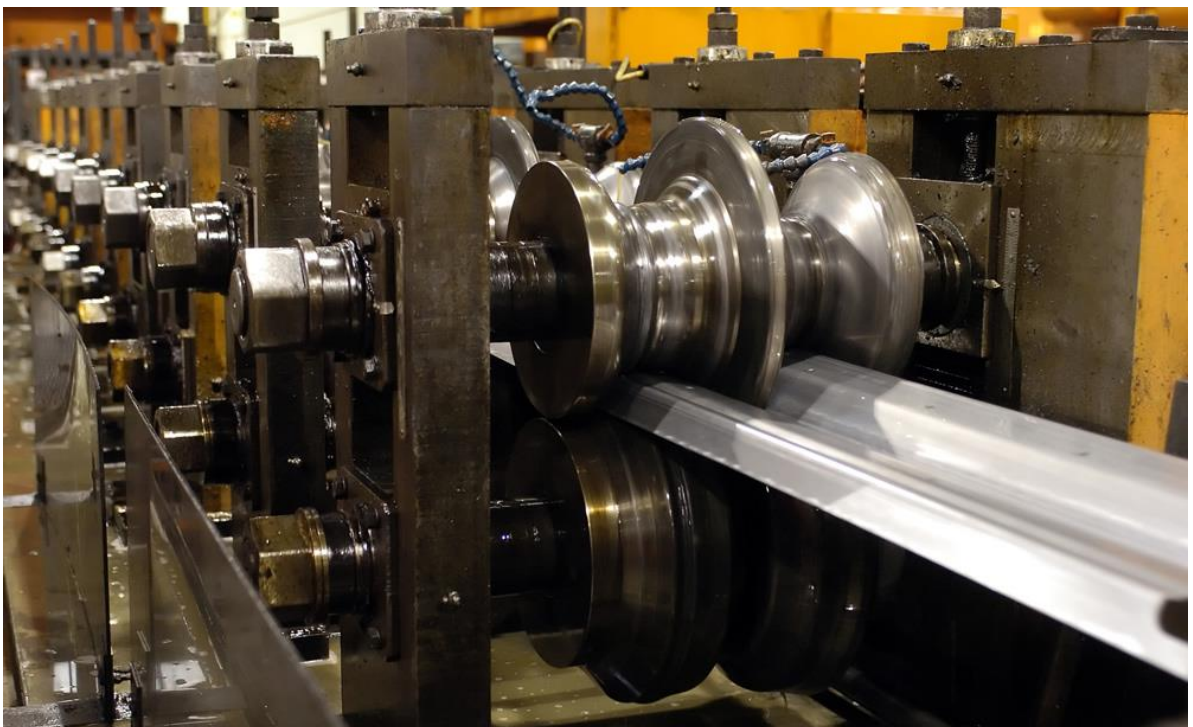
Forming methods for cold-formed steel members - Roll forming [1]
